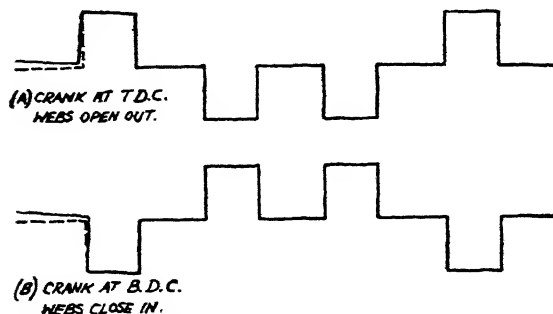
CRANKSHAFT WITH EXAGGERATED ALIGNMENT FAULT
